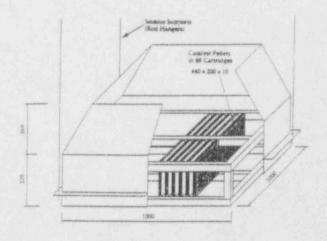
Drawing of the Prototype PAR Device (Dimensions are in cm.)
